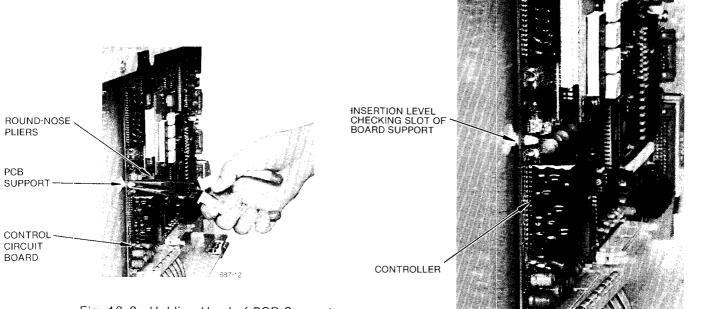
Holding Head of PCB Support with Round-nose Pliers
